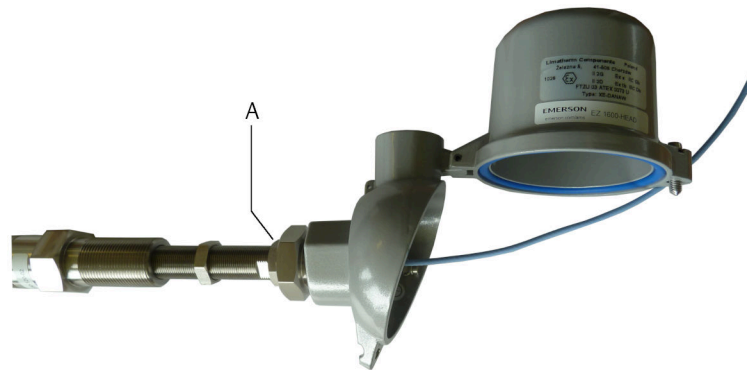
Assemble M16x1.5 cable gland and adapter
